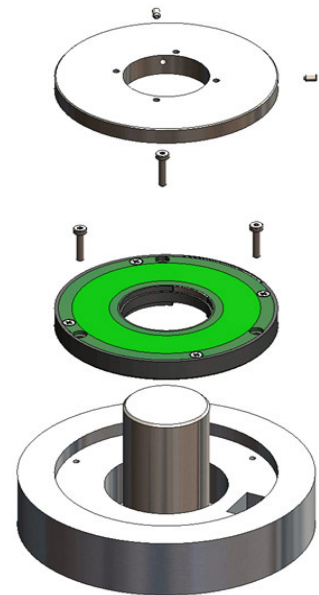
Kit encoders often are mounted on the motor's non-drive end. In some cases, it's useful to position the rotation measuring elements at the drive end of a motor. Ring-shaped hollow-shaft encoders can be installed around the drive shaft or in other positions in the drive train.
